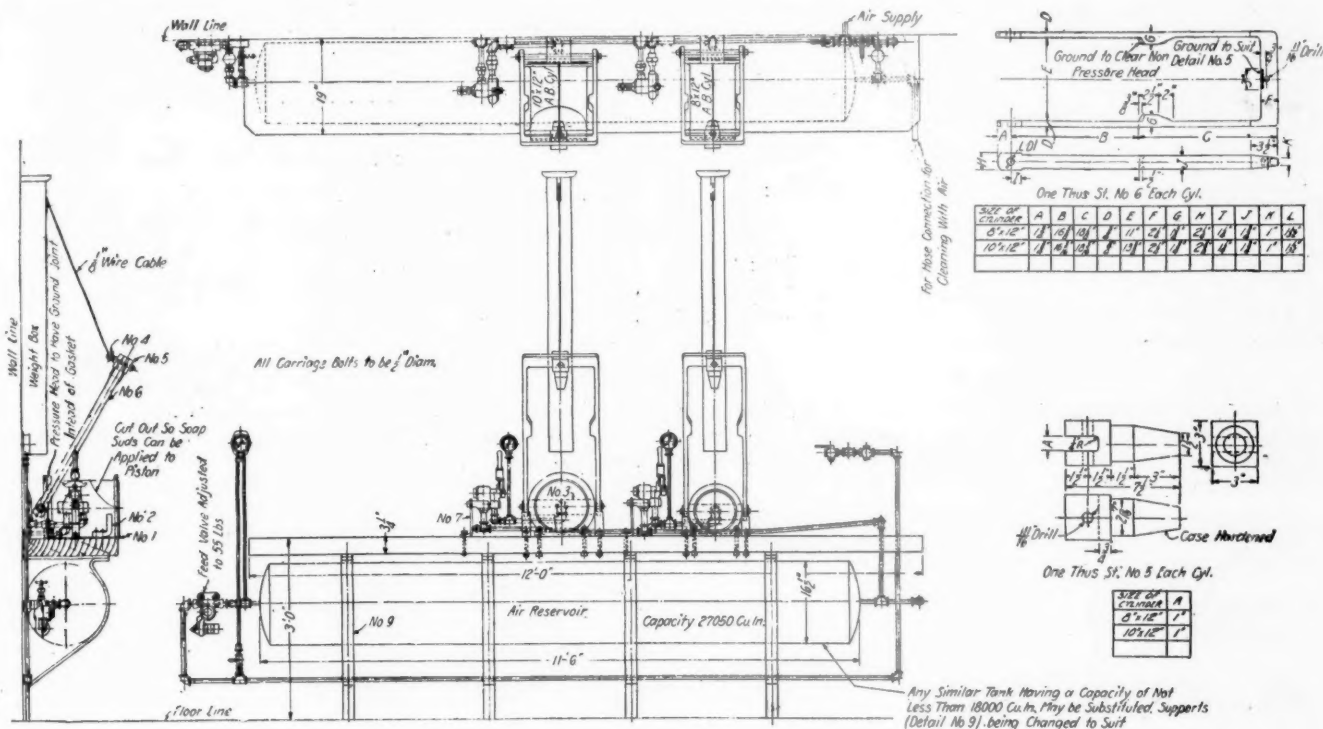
Brake Cylinder Packing Lever Test Rack
